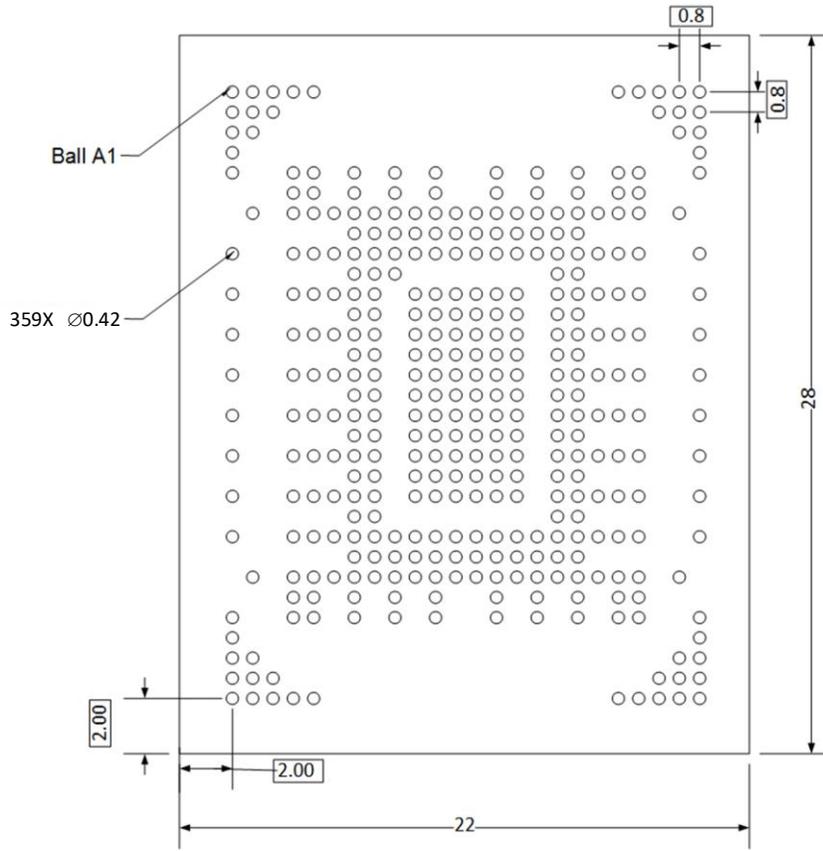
Recommended Land Pattern for M.2 Type 2228 BGA (Top View)
